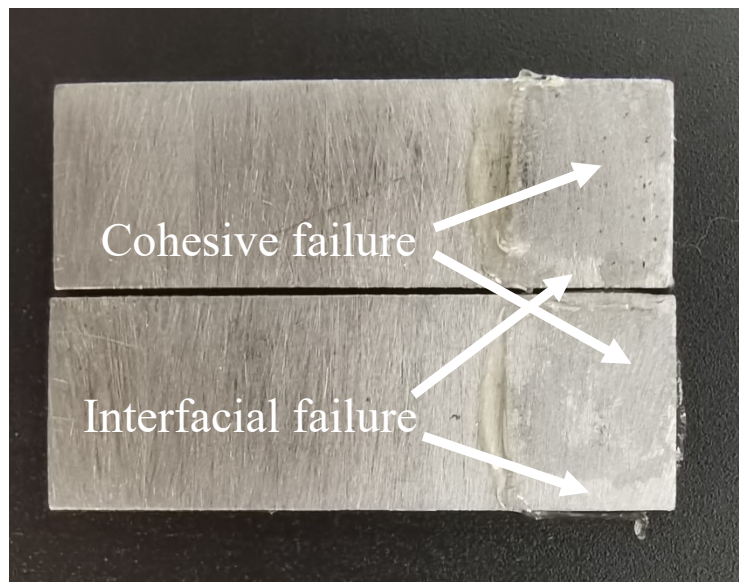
The fracture surface of D230-0.9 bonded to stainless steel as PSA.
